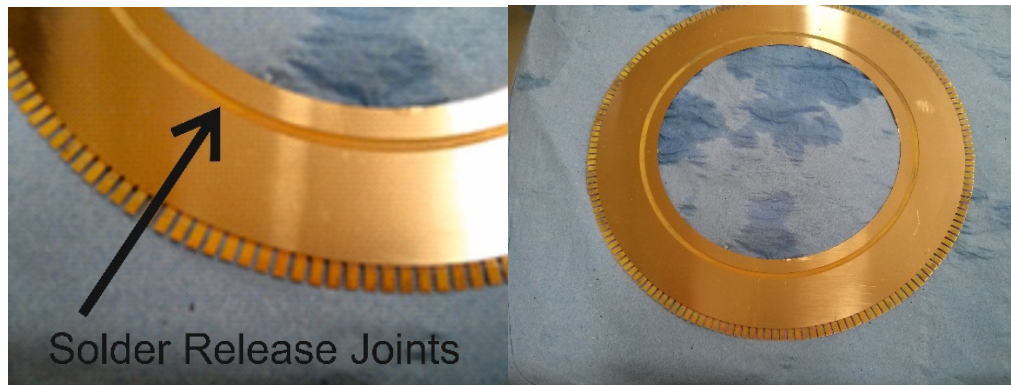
Copper sheets with etched solder release grooves in order to control the position of the solder.
